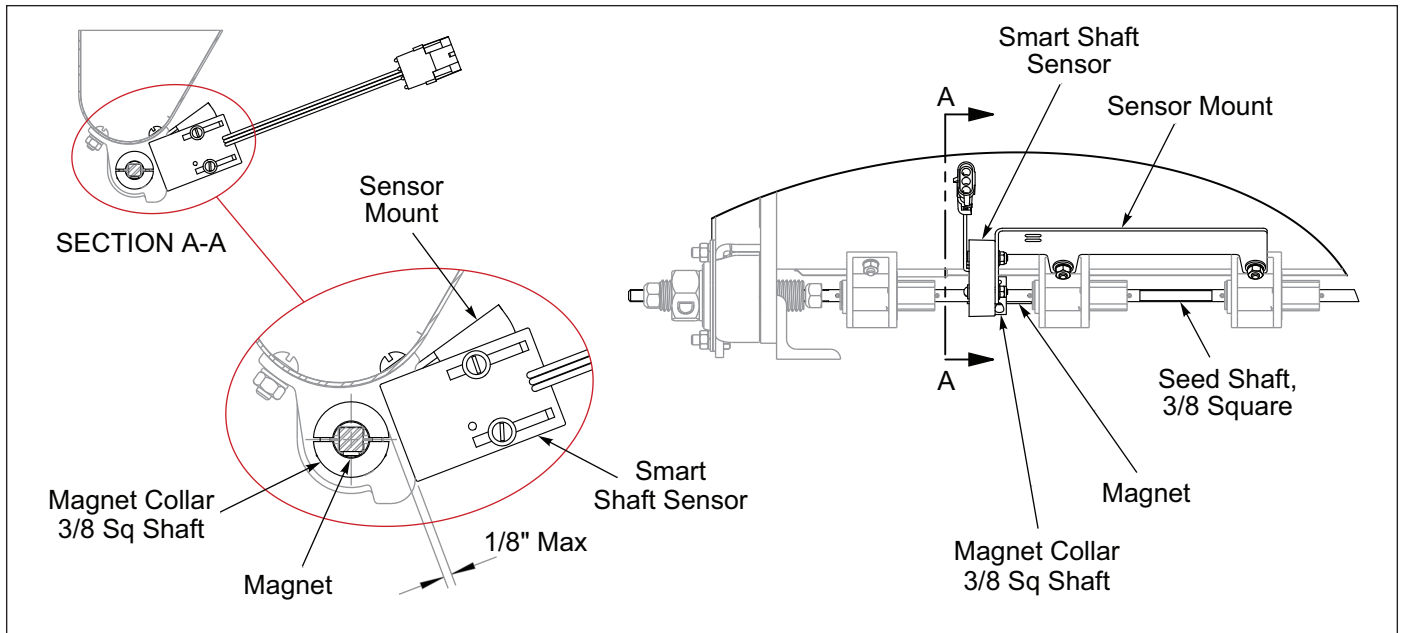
Brillion Elite Mini Monitor - Front Small Meter Seed Box Seed Shaft Sensor
